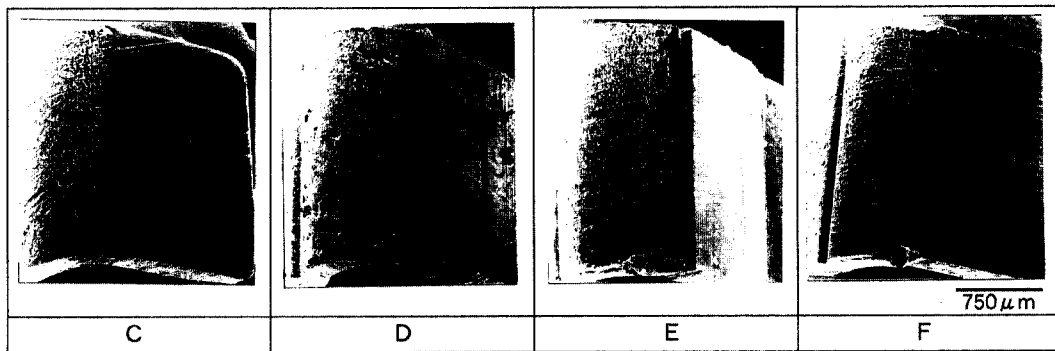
The fracture surface after the triple bending test of friction welding test specimen observed by optical microscope (middle part : left; Al / right; Fe).
